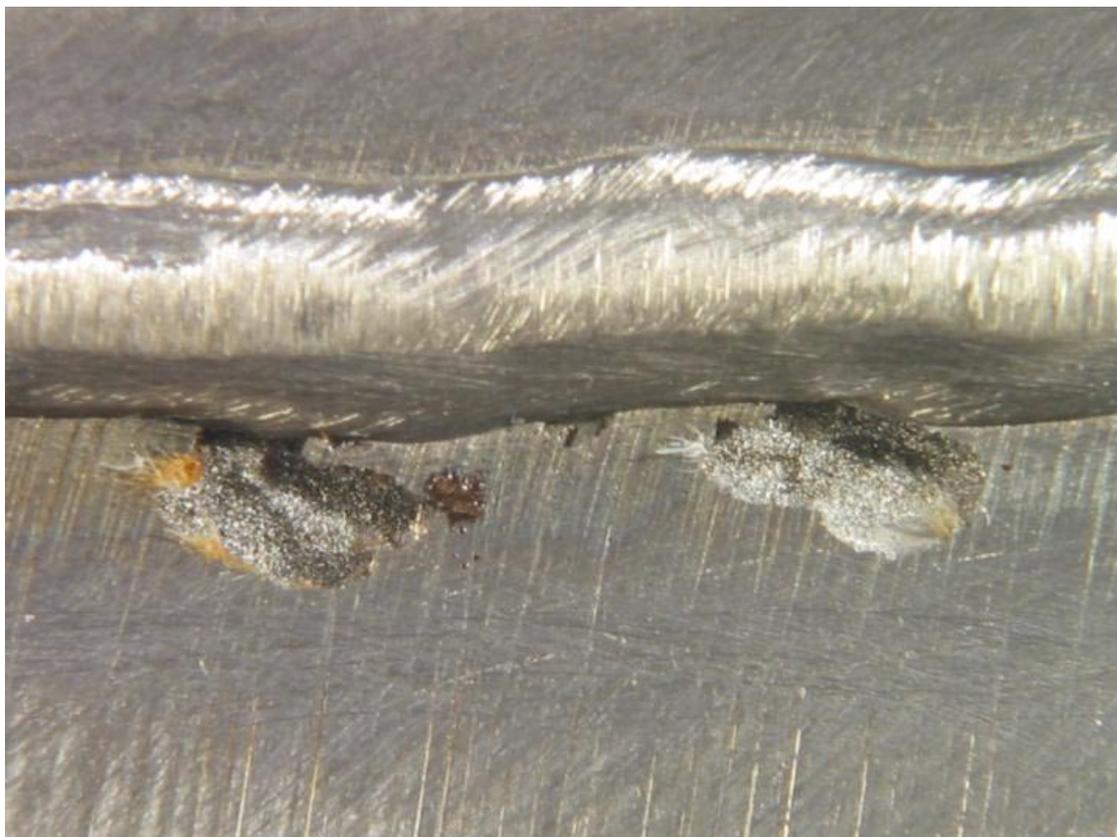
Root of weld in 27-7Mo plate showing pitting in HAZ (G48C at +70°C for 24hours) - Pitting resistance of welds in super austenitic steels.
